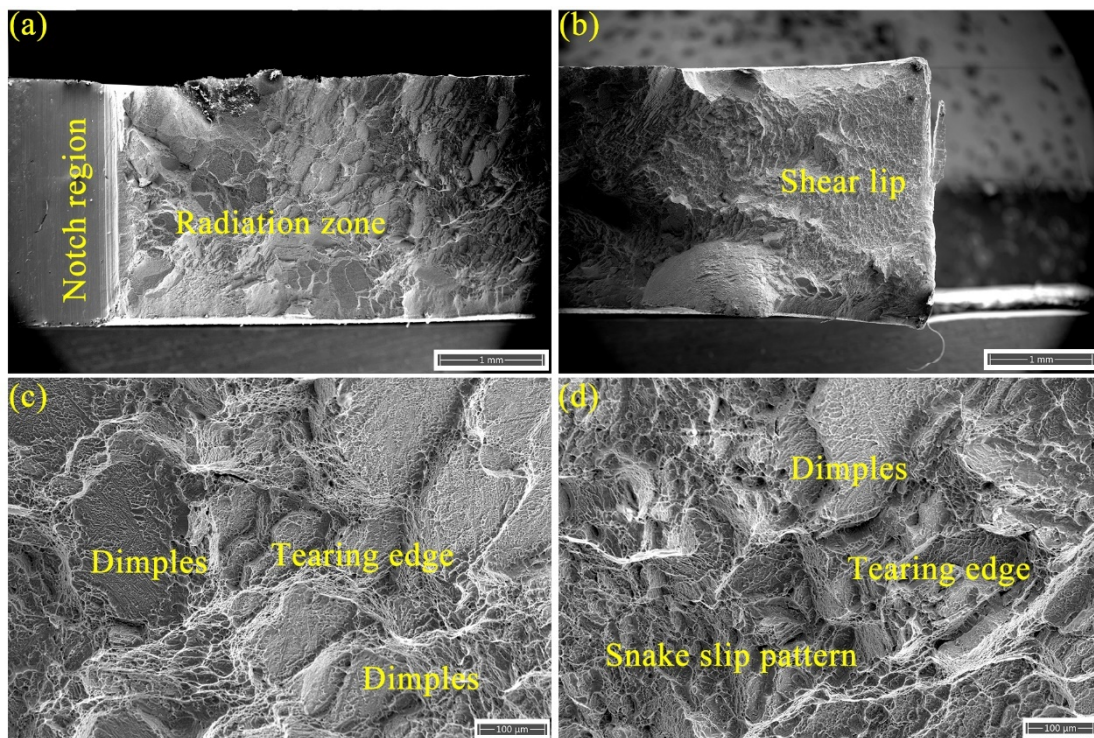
Impact fracture morphology of the weld metal. (a) notch region and radiation zone of the macroscopic fracture surface; (b) shear lip region of the macroscopic fracture surface; (c) enlarged view of the radiation region; (d) enlarged view of the shear lip region (Experimental parameters: $P = 3.0$ kW, $v = 1.2$ m/min, $F = +20$ mm).
